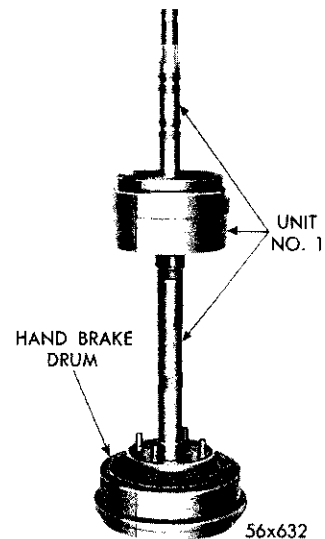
Using Propeller Shaft Flange and Brake Drum Assembly (As a Holding Fixture for Unit No. 1)
